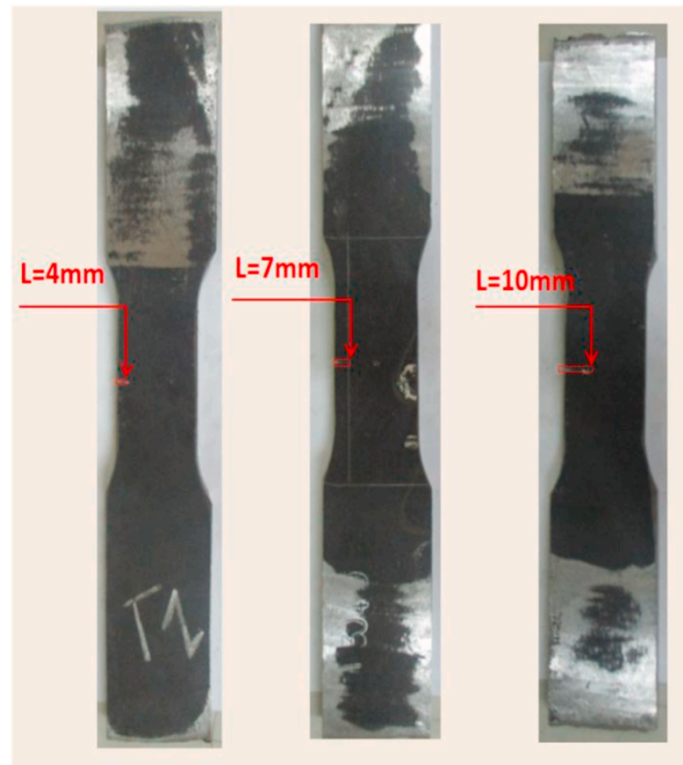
Test specimens carried out for tensile tests according to different crack lengths.
